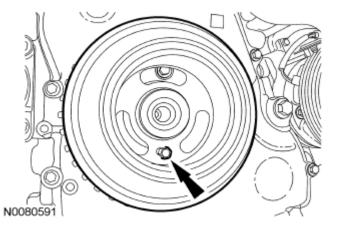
View Of Crankshaft Pulley And 6mm x 18 mm Bolt Courtesy of FORD MOTOR CO.
